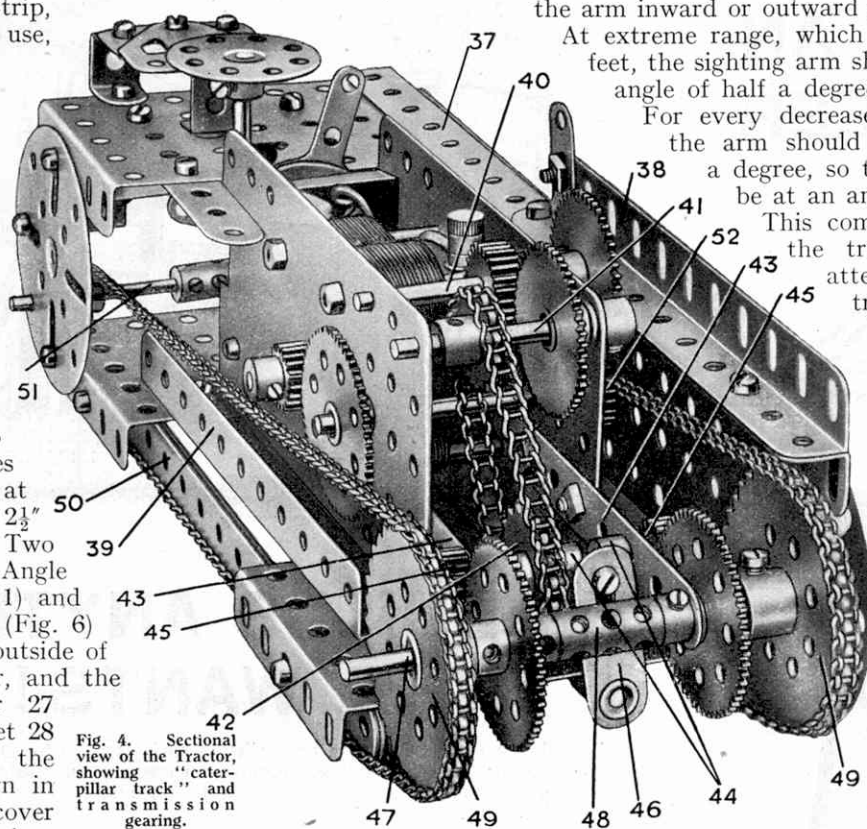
Sectional view of the Tractor, showing "caterpillar track" and transmission gearing.
